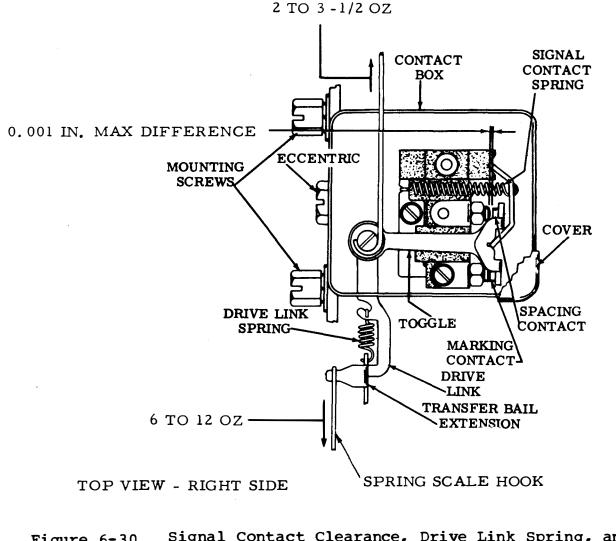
Signal Contact Clearance, Drive Link Spring, and Signal Contact Spring
